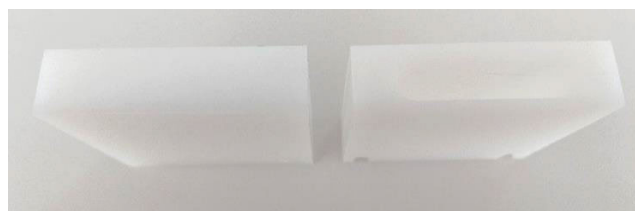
Photography of Sample 3 (a) and 3(b) made from Polyethylene (PE): 20 mm × 75 mm × 75 mm (b) drilled-out “defect” ~ 50 mm × 10 mm.
